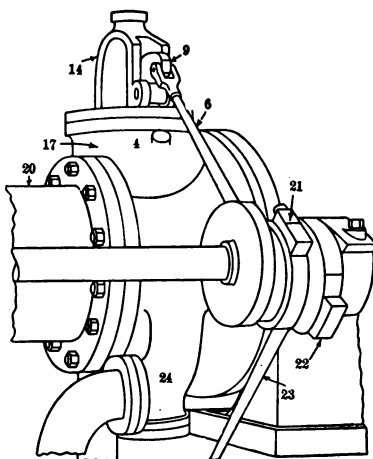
CYLINDER AND SEPARATE VALVE CHEST FOR NORDBERG ENGINE USING SUPERHEATED STEAM
